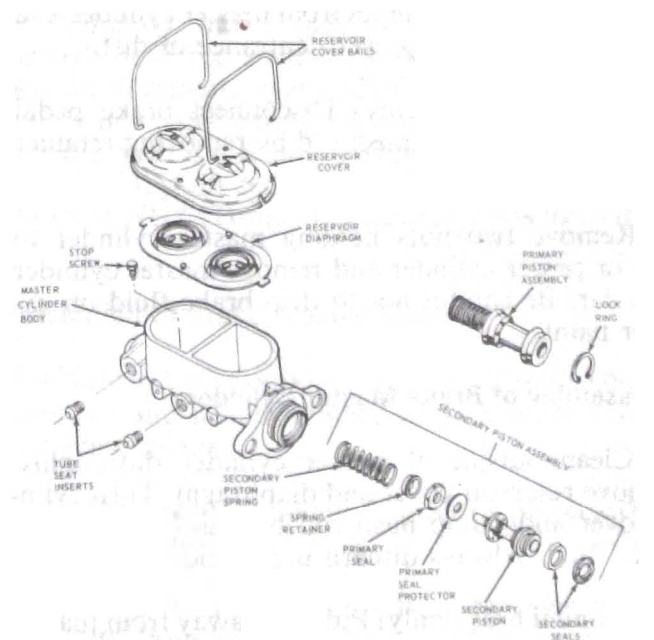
C-3 Exploded View - Power Brake Master Cylinder X-Car
